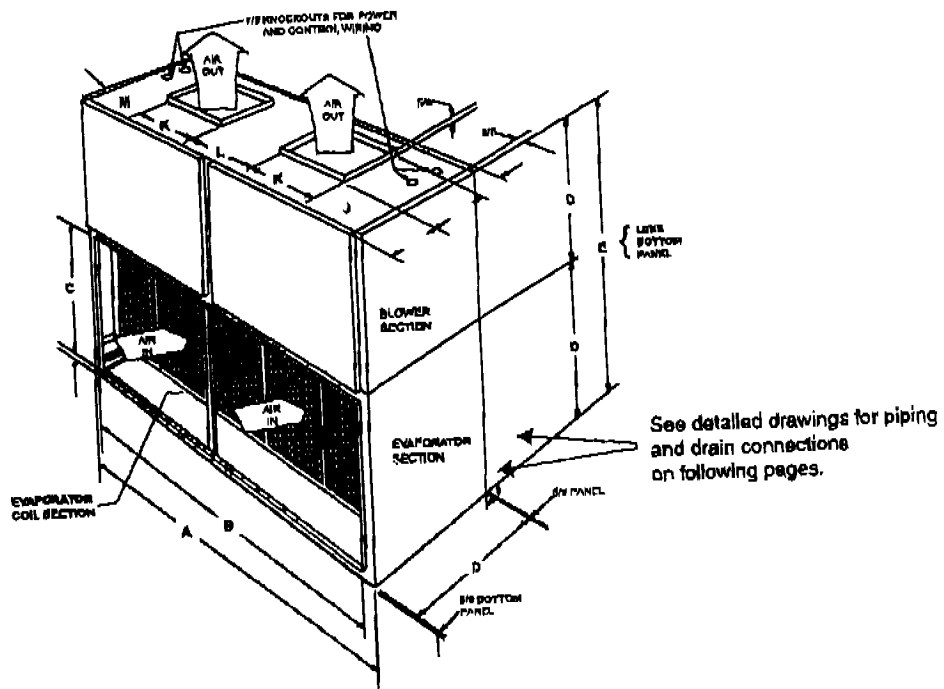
UNIT DIMENSIONS - LA300, LB360 & LB480
